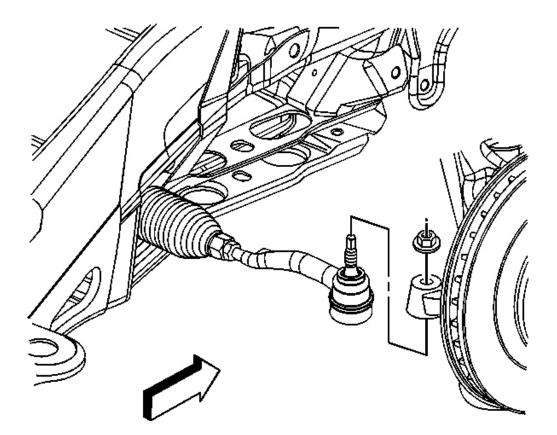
View Of Tie Rod & Steering Knuckle Courtesy of GENERAL MOTORS CORP.
